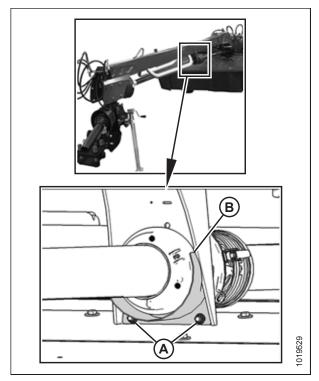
Driveline Cover and Shield Installed at Center Support
